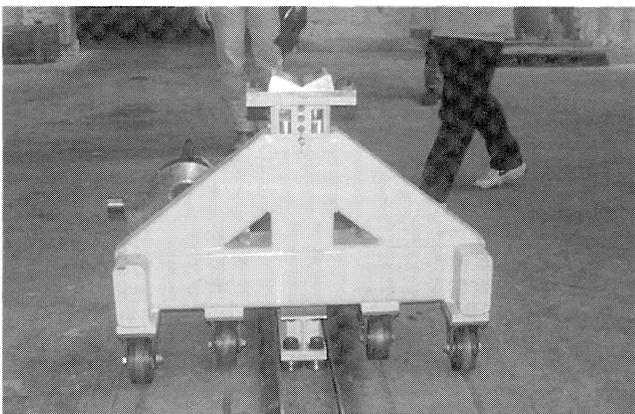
Rolling V-Block Stand Used to Support the Rotor in the Horizontal Position.
